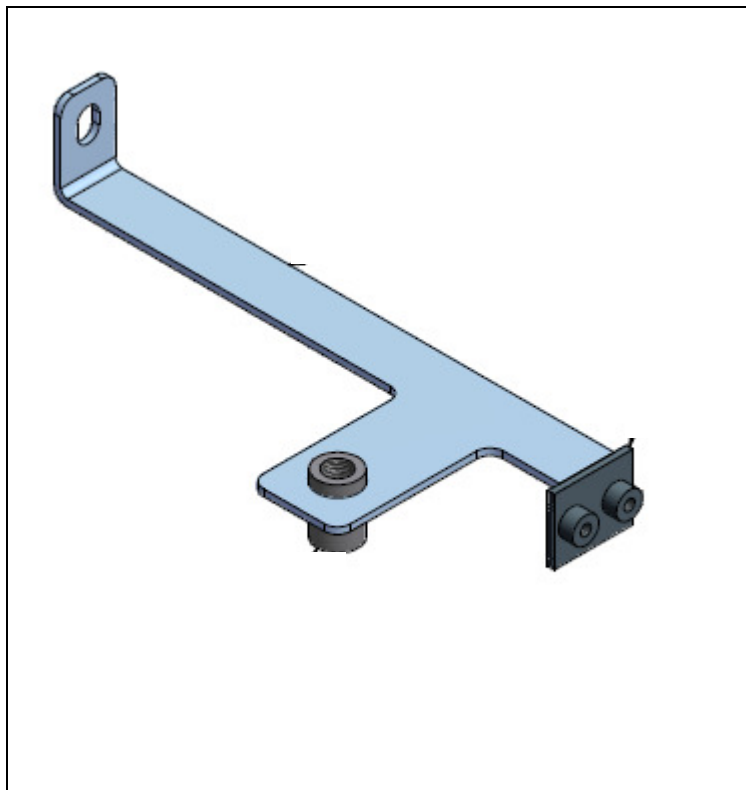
For coolant loss valve installation to the engine bay area, the existing dipstick support can be replaced with a modified support assembly (Part No. 5-04100154).
